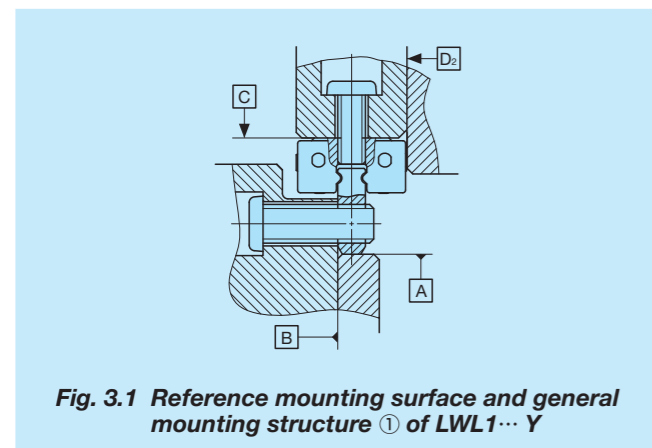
Reference mounting surface and general mounting structure ① of LWL1...Y
